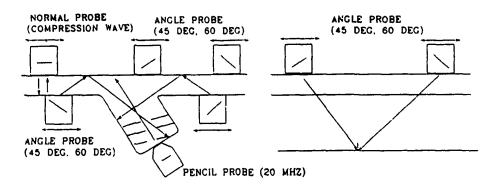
JT9D - Sample 1 Possible Angle Beam Directions Through Weld Repair Of Service Induced Crack
